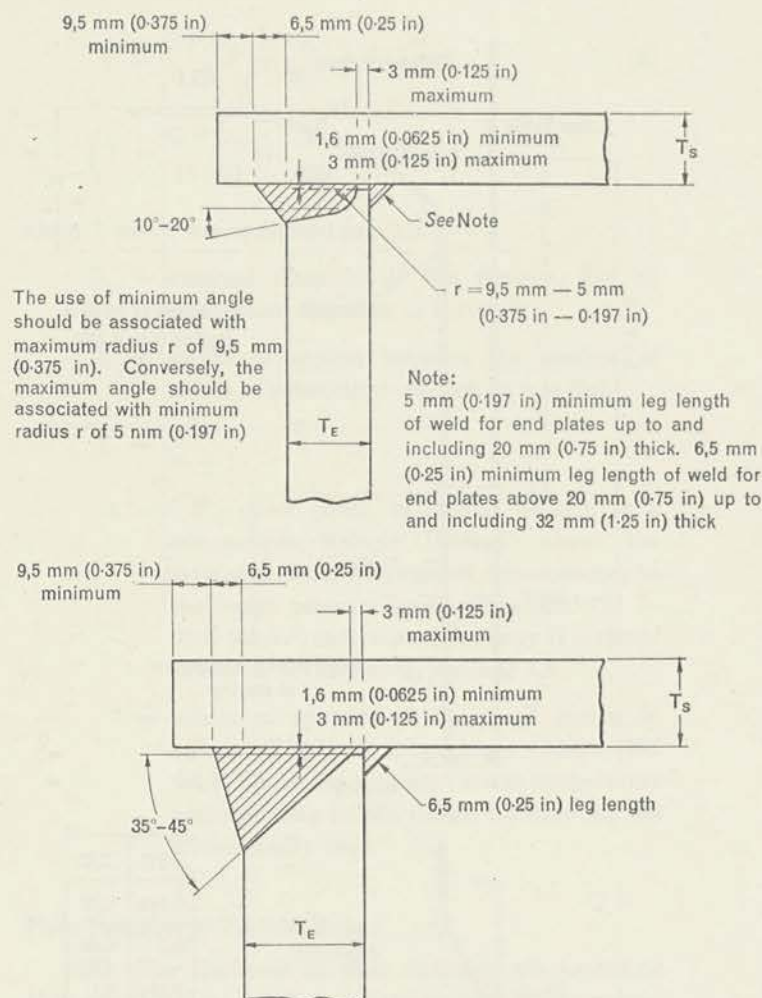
ATTACHMENT OF UNFLANGED FLAT END PLATES TO SHELL
